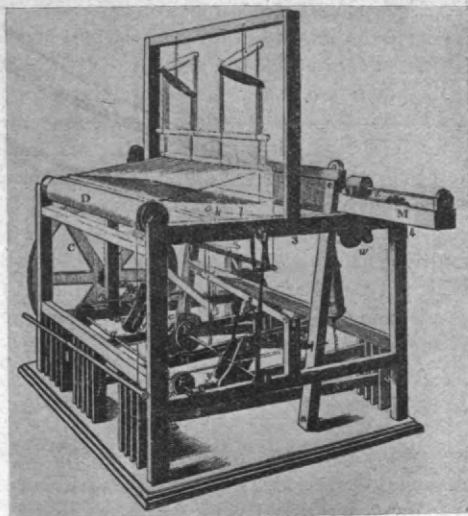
AUSTIN'S MACHINE-LOOM.
